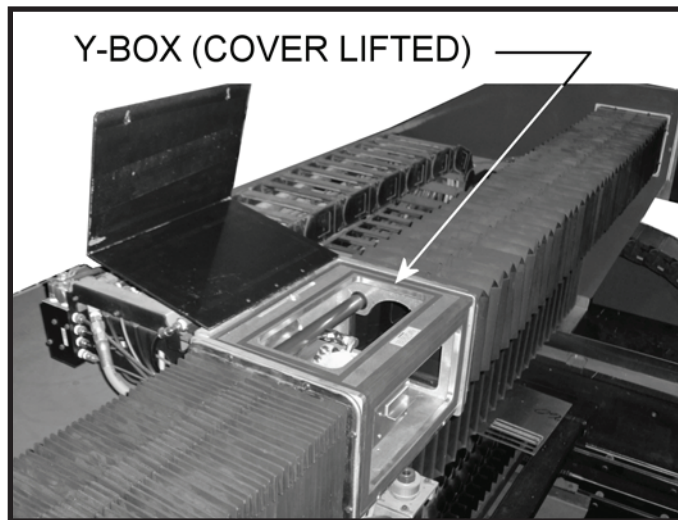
Gantry cover removed to access moving Y-mirror
